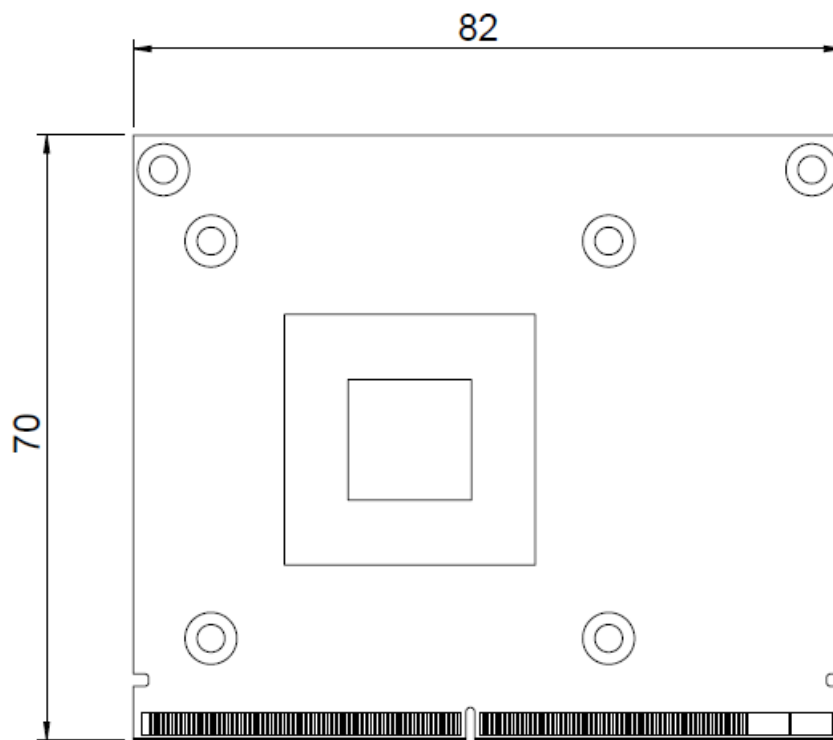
EGX-MXM-AD2000 mechanical dimensions
